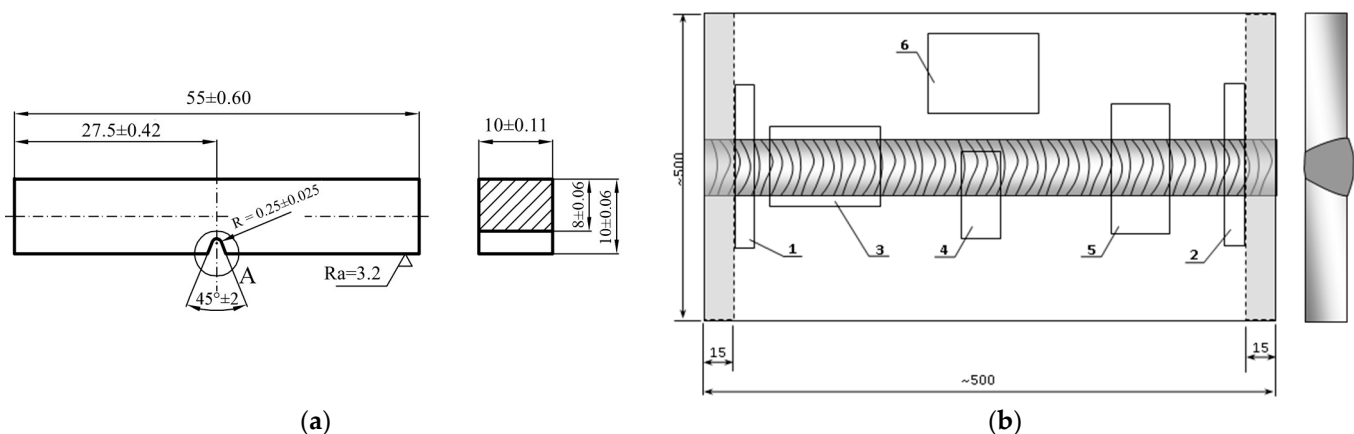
(a) Charpy specimen. (b) Scheme of specimen preparation: 1. metallography; 2. hardness; 3. Charpy for weld metal; 4 and 5. tensile testing; 6. Charpy for base metal.
